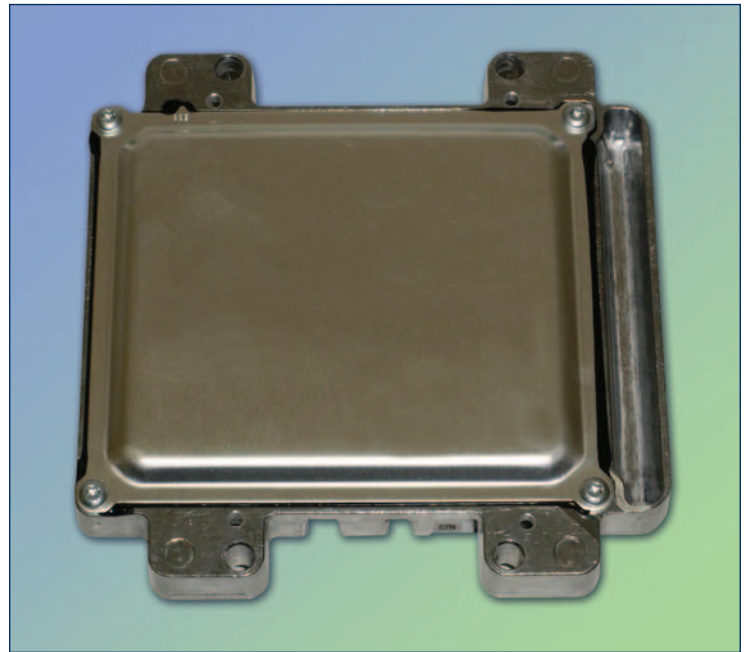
Engine control module (ECM) requiring screening for a cracked solder joint.
